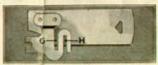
When work is to be shirred, this shirring plate replaces the front slide of the machine.
